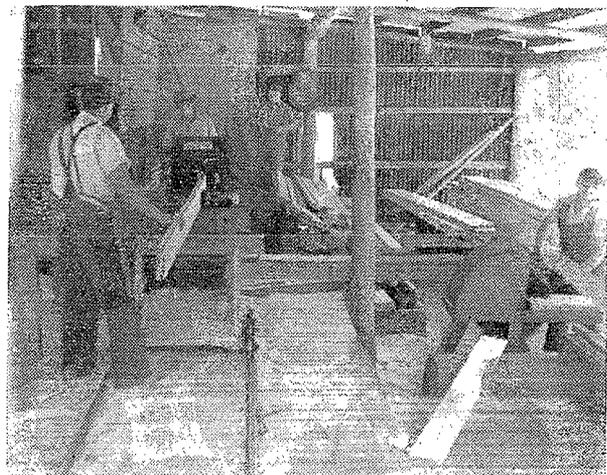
A view showing the edging-and-small-dimension bench, the mill discharge skids, and the docking saw
